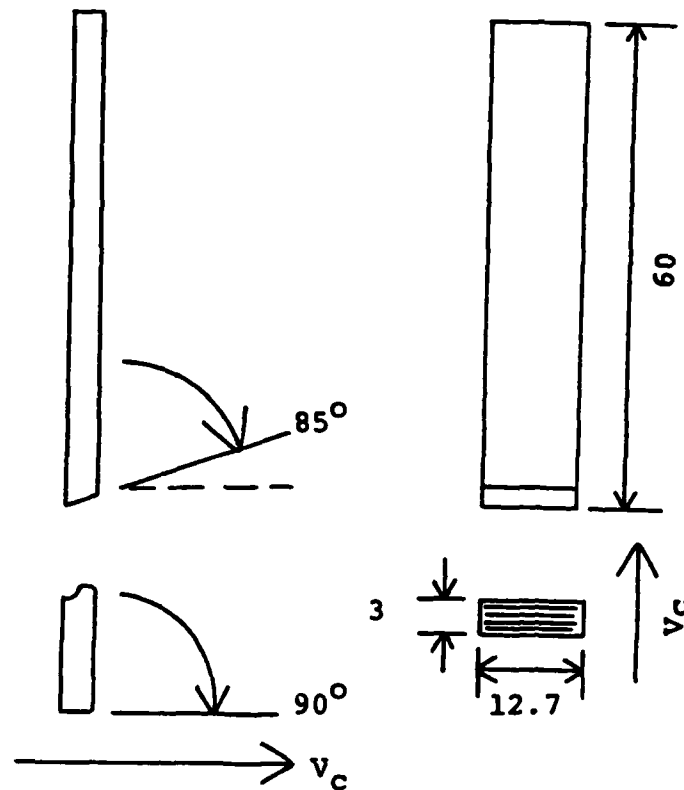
Blade specimen with negative rake angle of  $85^\circ$  (upper left) and  $90^\circ$  (lower left). Blade tip shown at lower right has lay perpendicular to rubbing direction. All dimensions are in millimeters.
